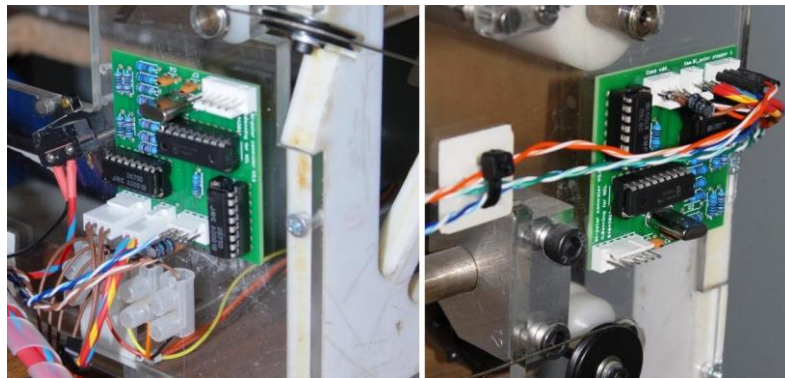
The installed bipolar PCB's (mark 2) held in place by adhesive. Left: carriage controller, Right: OPC and deposition roller controller.
